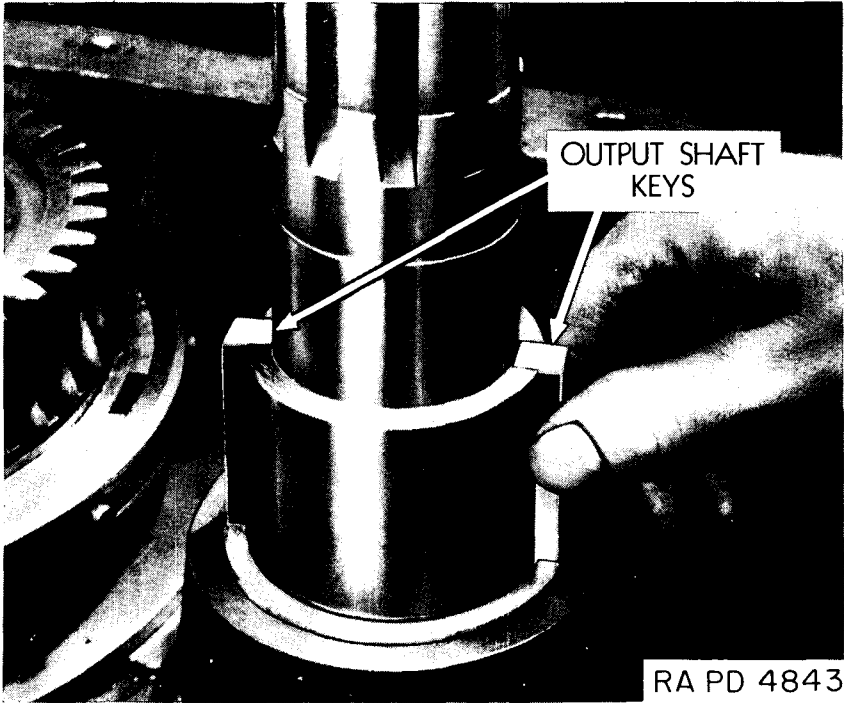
REPLACING KEYS IN OUTPUT SHAFT
